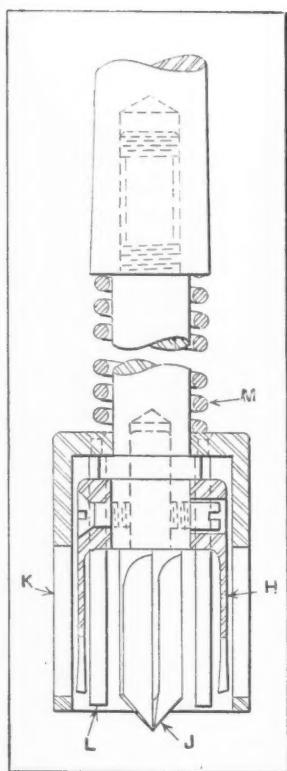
Trepanning Tool Used in Fixture Shown in Fig. 1
